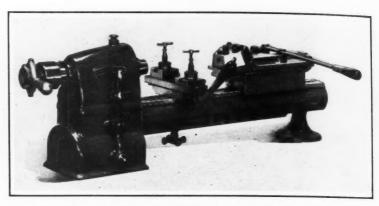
"Cataract" Hand Screw Machine with the Same Headstock as the Bench Lathe
